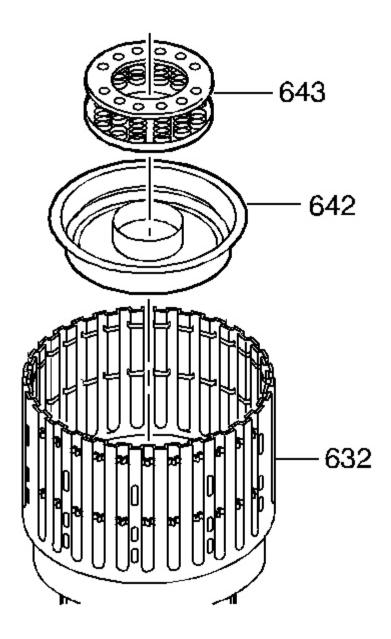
Locating Third Clutch Piston And Seal Assembly Courtesy of GENERAL MOTORS CORP.
